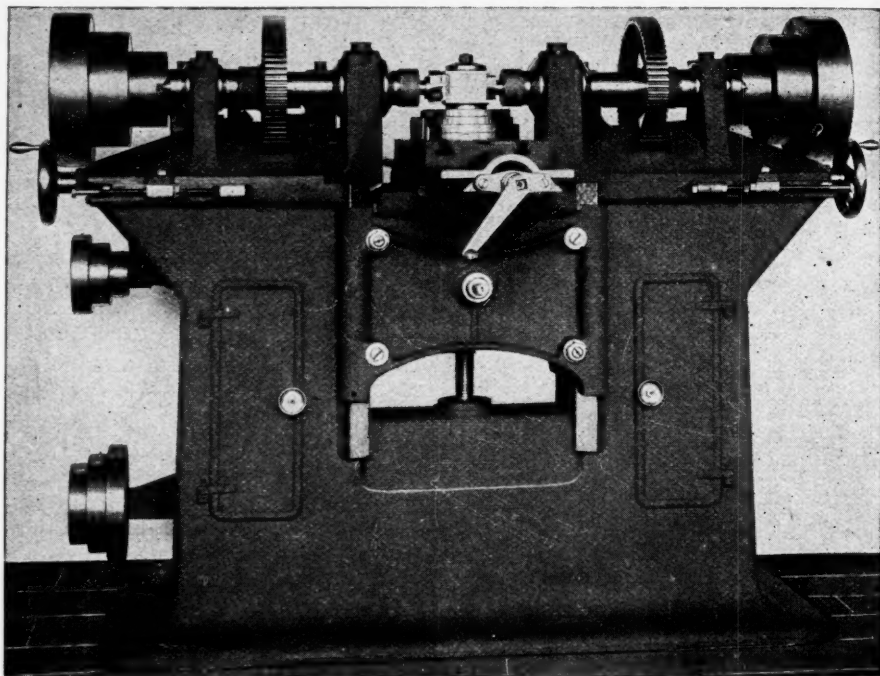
DUPLEX DOUBLE COLUMN MILLING-MACHINE.
